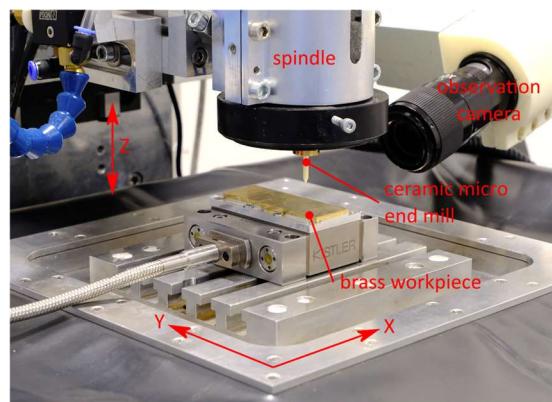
High precision CNC 3-axis machine tool used for the milling trials.
